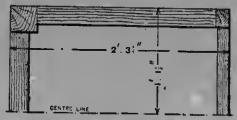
Half Plan of Easy Chair Seat Frame.
